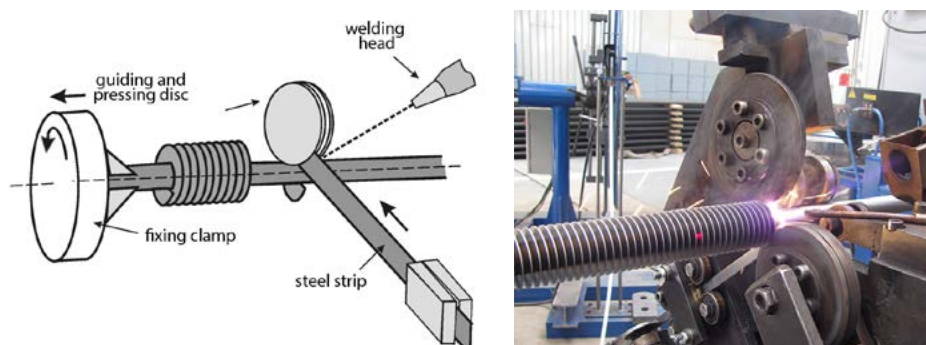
Stand for laser welding of ribbed pipes developed at Energoinstal S.A.:
